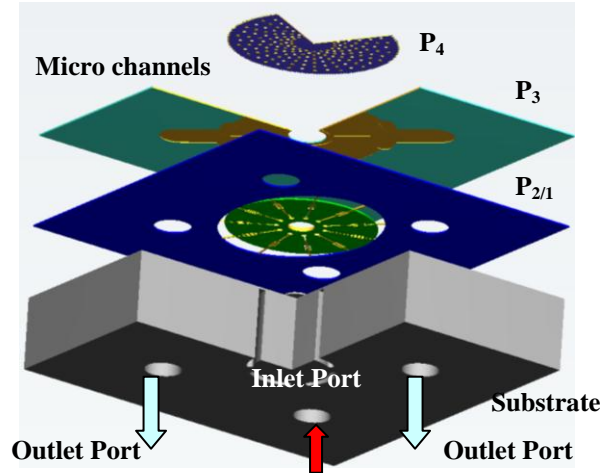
Exploded and Cut View of the Rotary Vane Micro-Motor idea.
